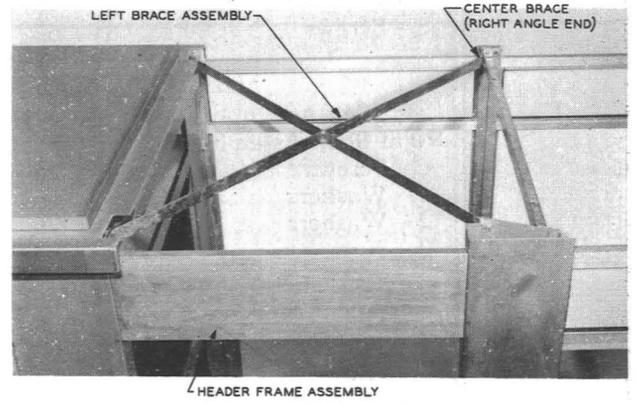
ASSEMBLING HEADER FRAME ASSEMBLY
